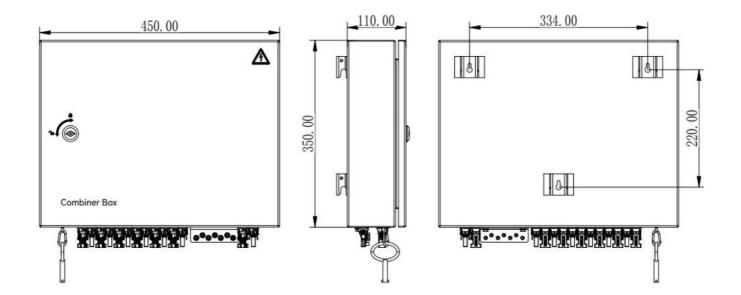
Dimensions of the CB-03A06S-A Combiner Box
